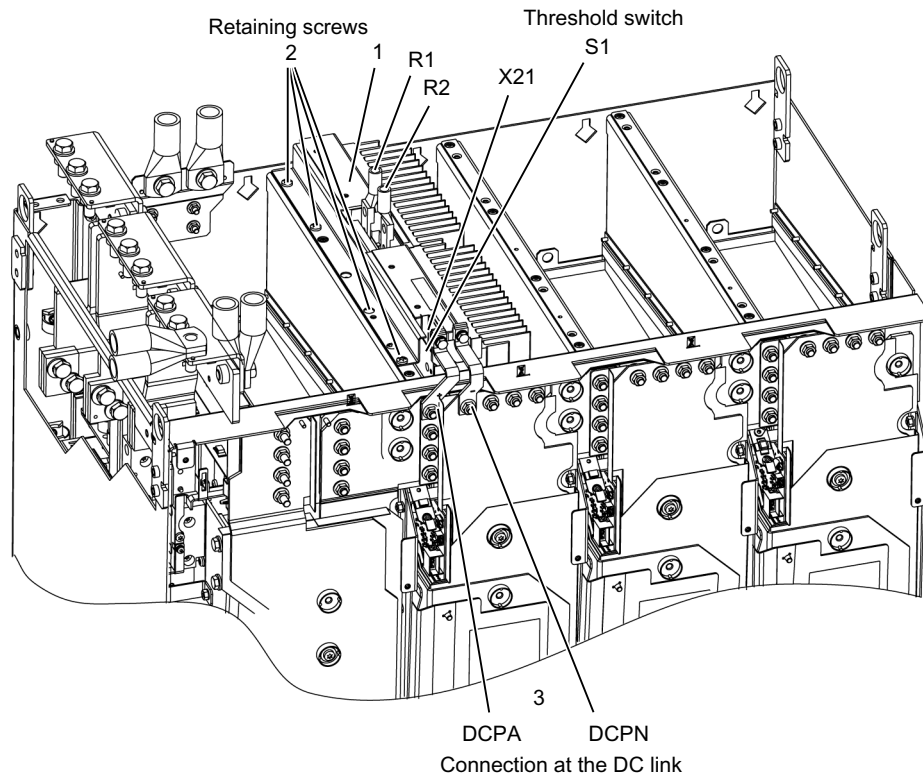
Installing the Braking Module in a Smart Line Module / Active Line Module / Motor Module, frame size JX
